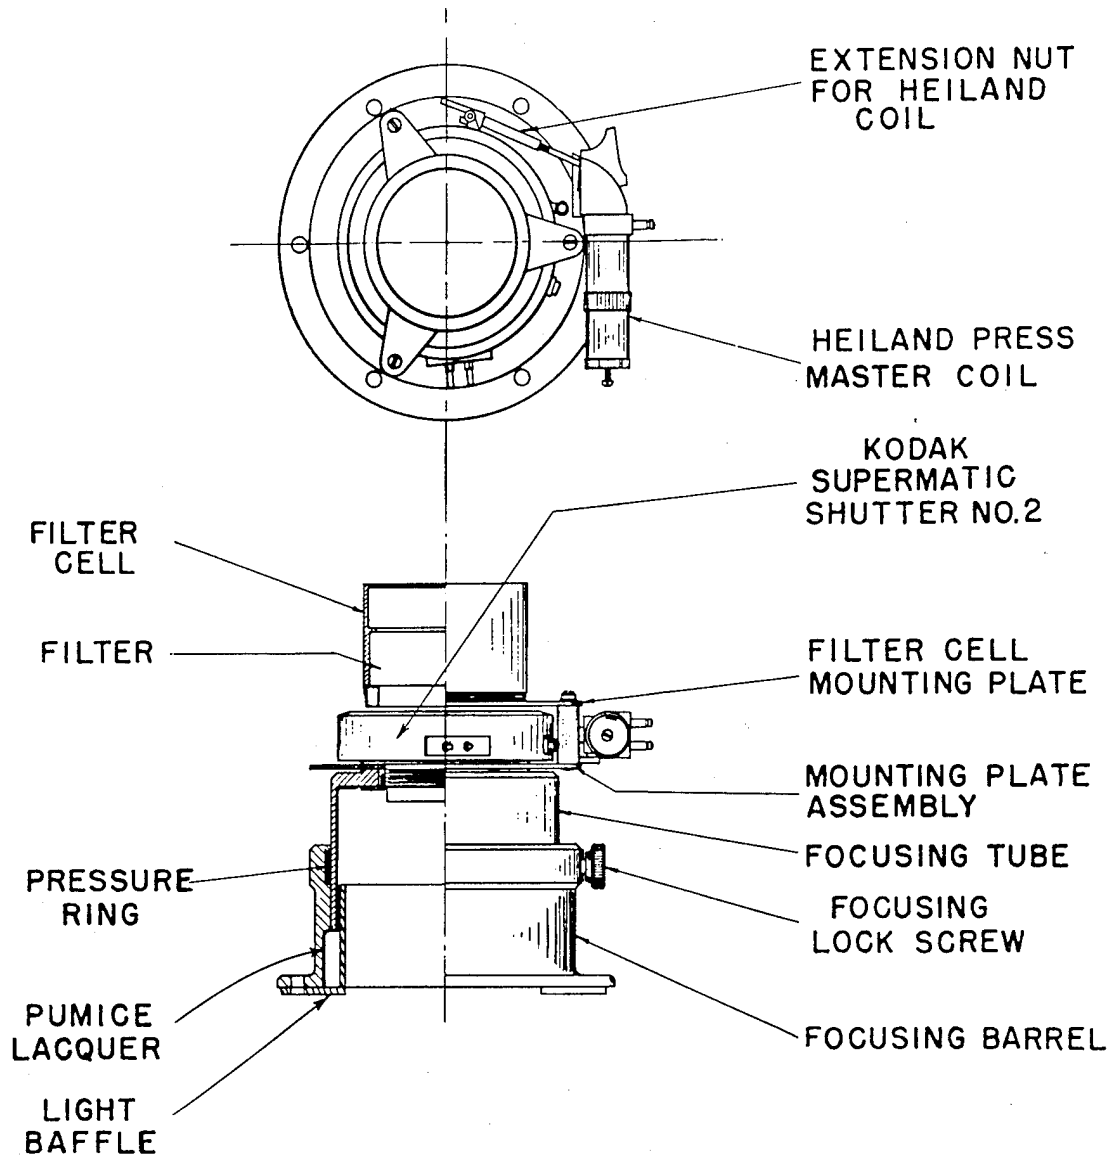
Diagrammatic Sketch of Optical and Shutter Assembly
